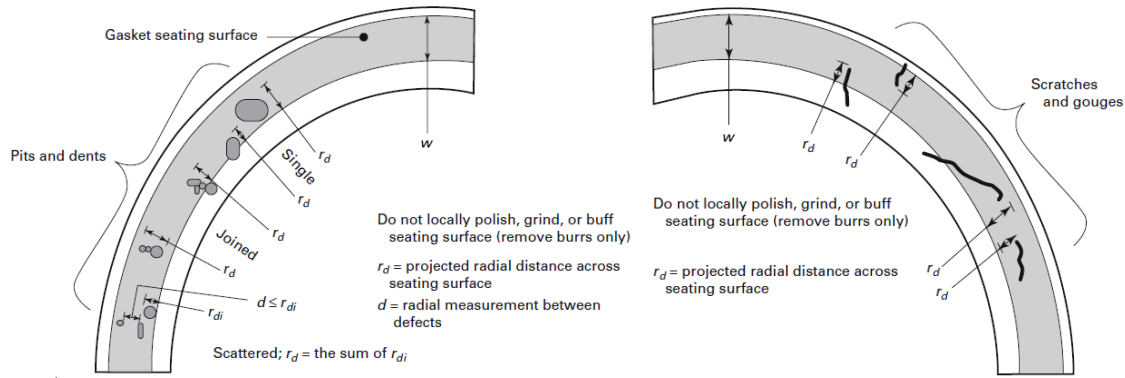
Imperfections on joints and gaskets [Nor´13]
